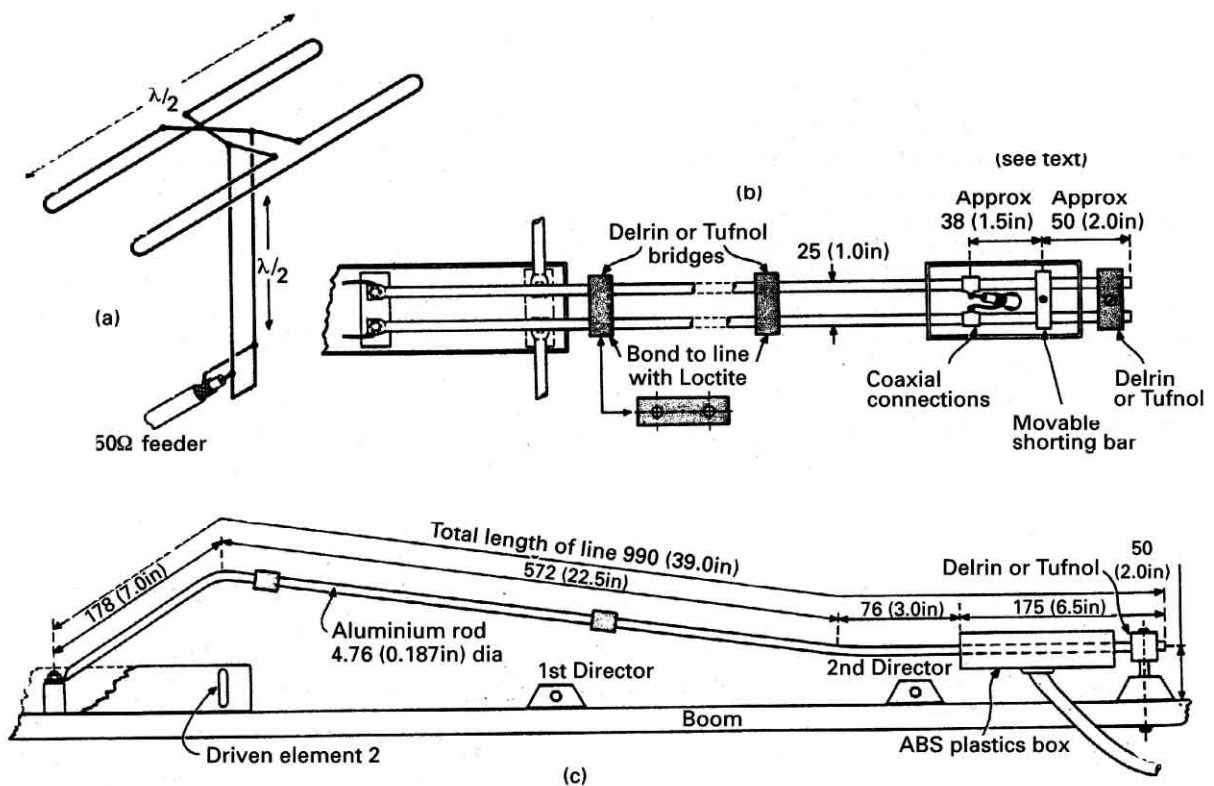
(a) Method of half wave line match to primary radiators. (b) Top view of matching line assembly. (c) Side view.
